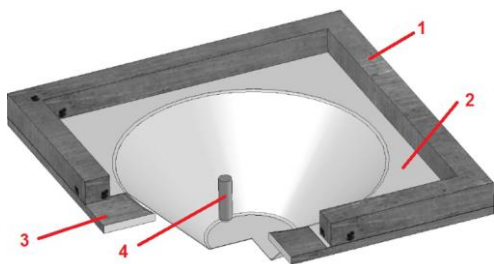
Illustration of SPIF in cross sectional view, with 1: clamping frame, 2: sheet, 3: faceplate, 4: forming tool
